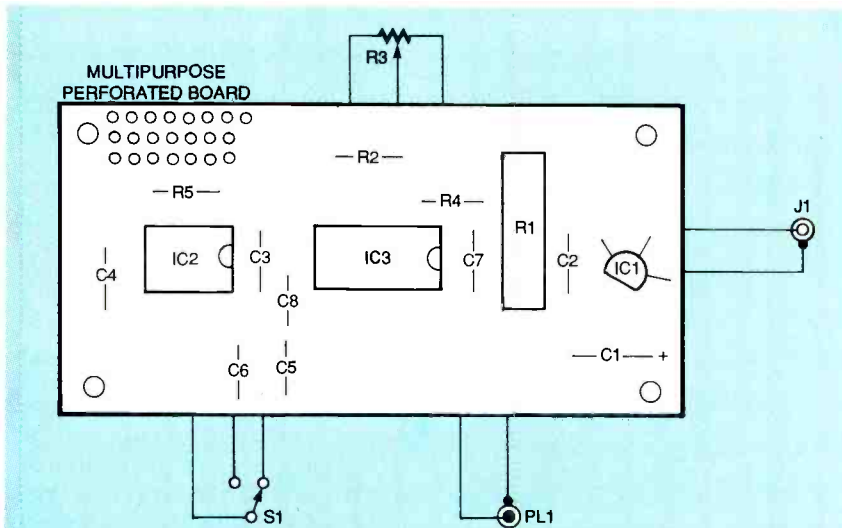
USE THIS AS A GUIDE for positioning the parts on the perforated construction board.
